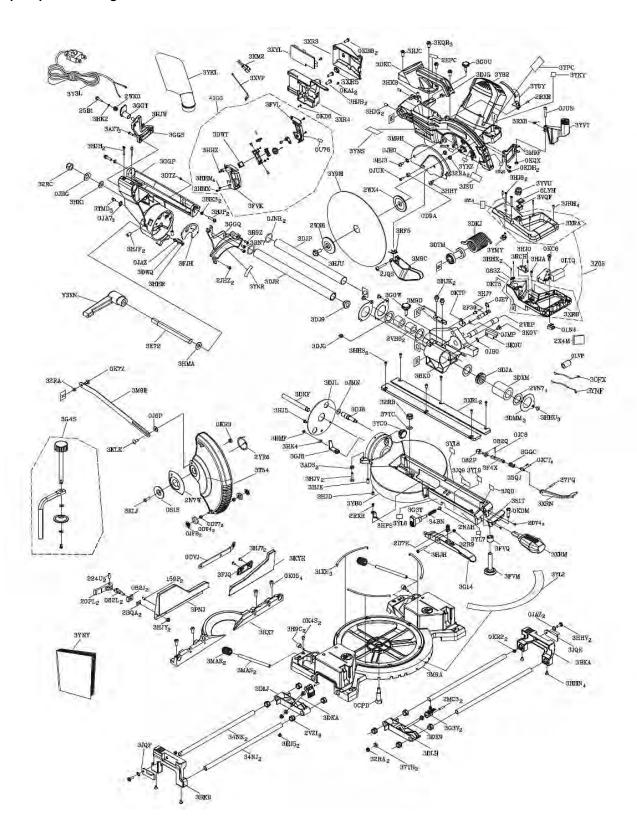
Spare parts drawing 1 KGZ 2540 VARIO
